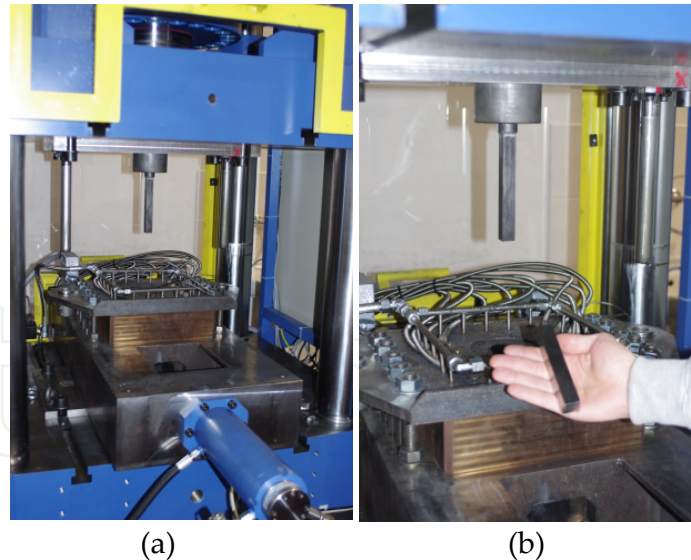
Machine for ECAP process (a) detail of assembly and processed sample (b)
